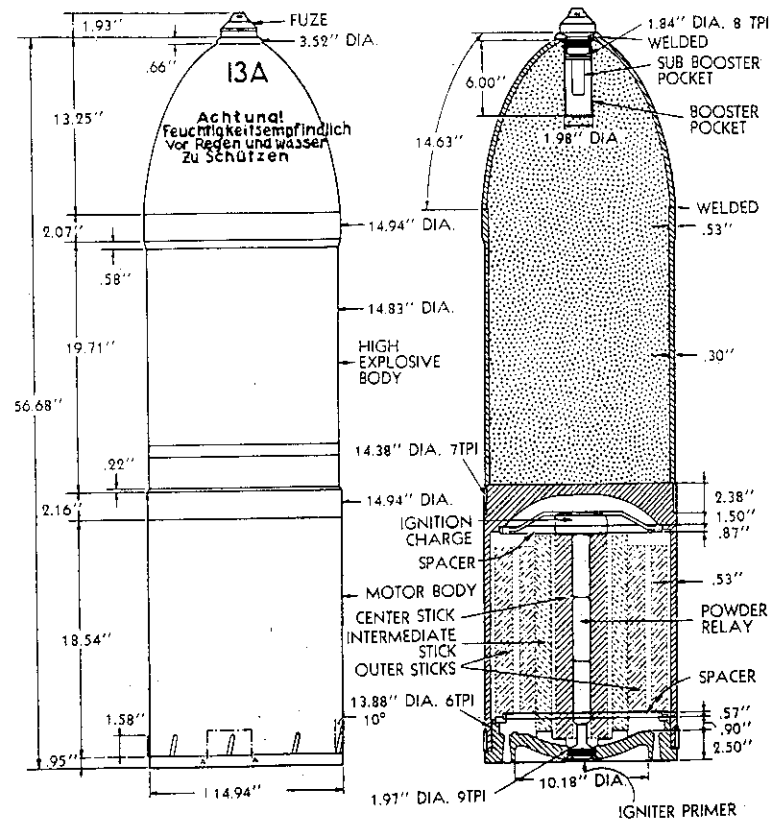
Basic dimensions and internal layout of complete 38-cm projectile.
